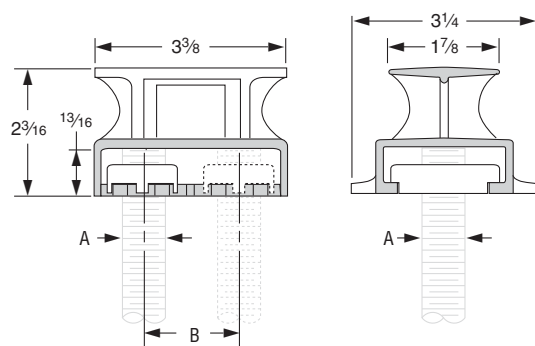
CB: Load (lbs) • Weight (lbs) • Dimensions (in)
